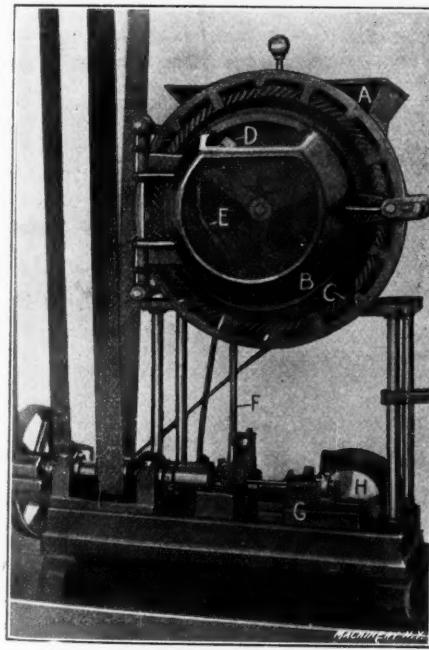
Automatic Trimming Machine for Trimming the Shells to Length
